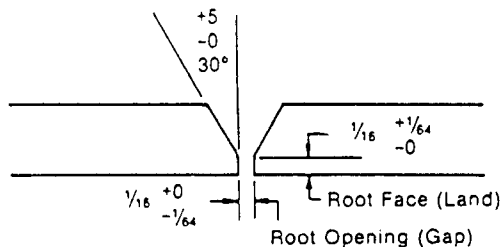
Recommended joint preparation and typical procedures—operate within these tolerances to help ensure good-quality welds.
